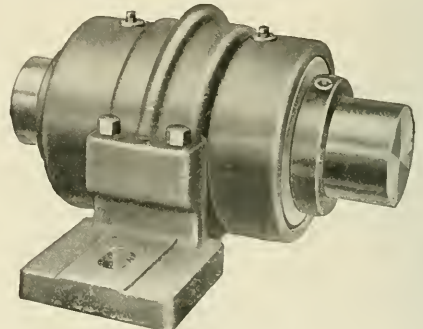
Self-Aligning Double Ball Bearing Pillow Block
